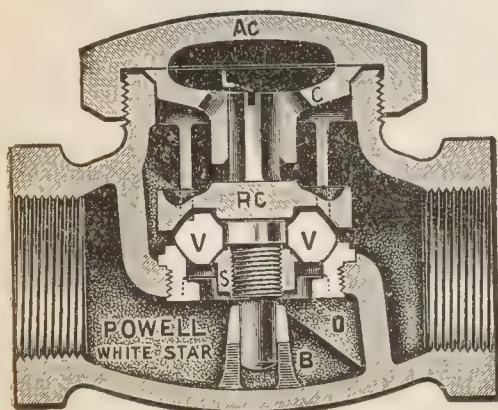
,176.—Powell White Star check valve with renewable bronze seat, regrindable, reversible, removable valve. In the $\frac{1}{2}$ in. size the disc and stem is in one piece, in the $\frac{3}{4}$ in. and larger sizes the discs are reversible. The seats can be renewed when worn out by unscrewing same by means of the wrench lugs O. Simply insert a flat bar of steel of proper width to fill the diameter of the opening of seat and unscrew.
